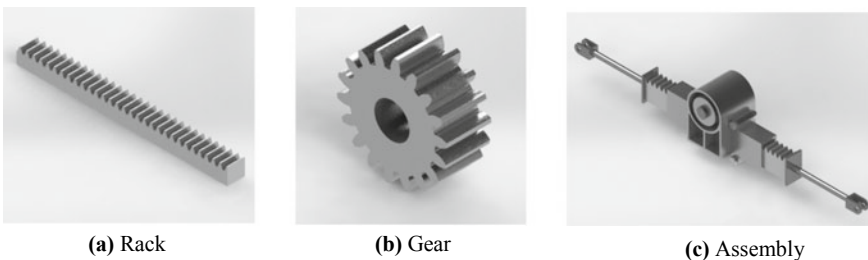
a Rack. b Gear. c Assembly. *Source* SolidWorks user manual
